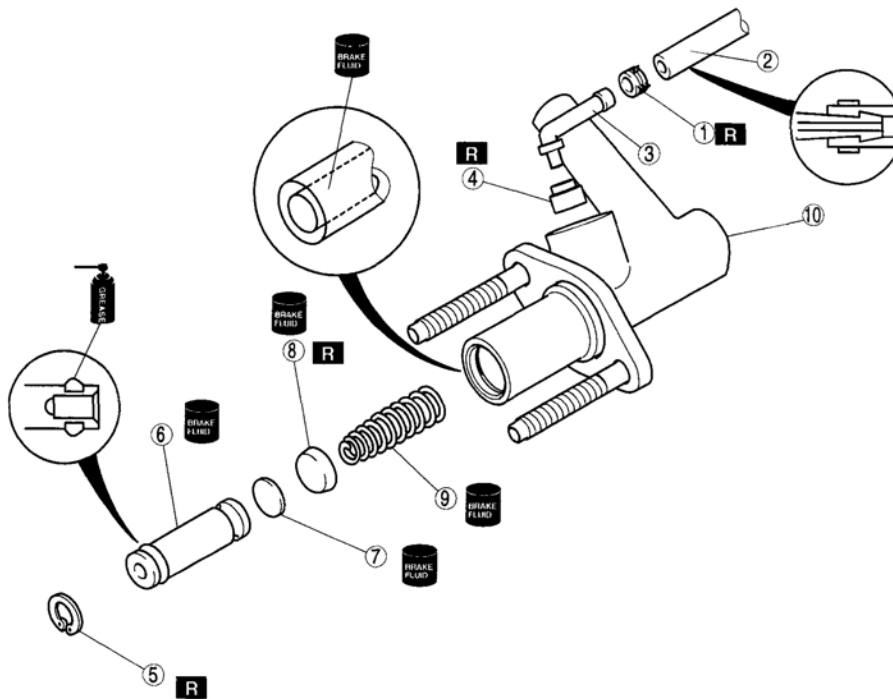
Identifying Clutch Master Cylinder Components (With Torque Specifications)
